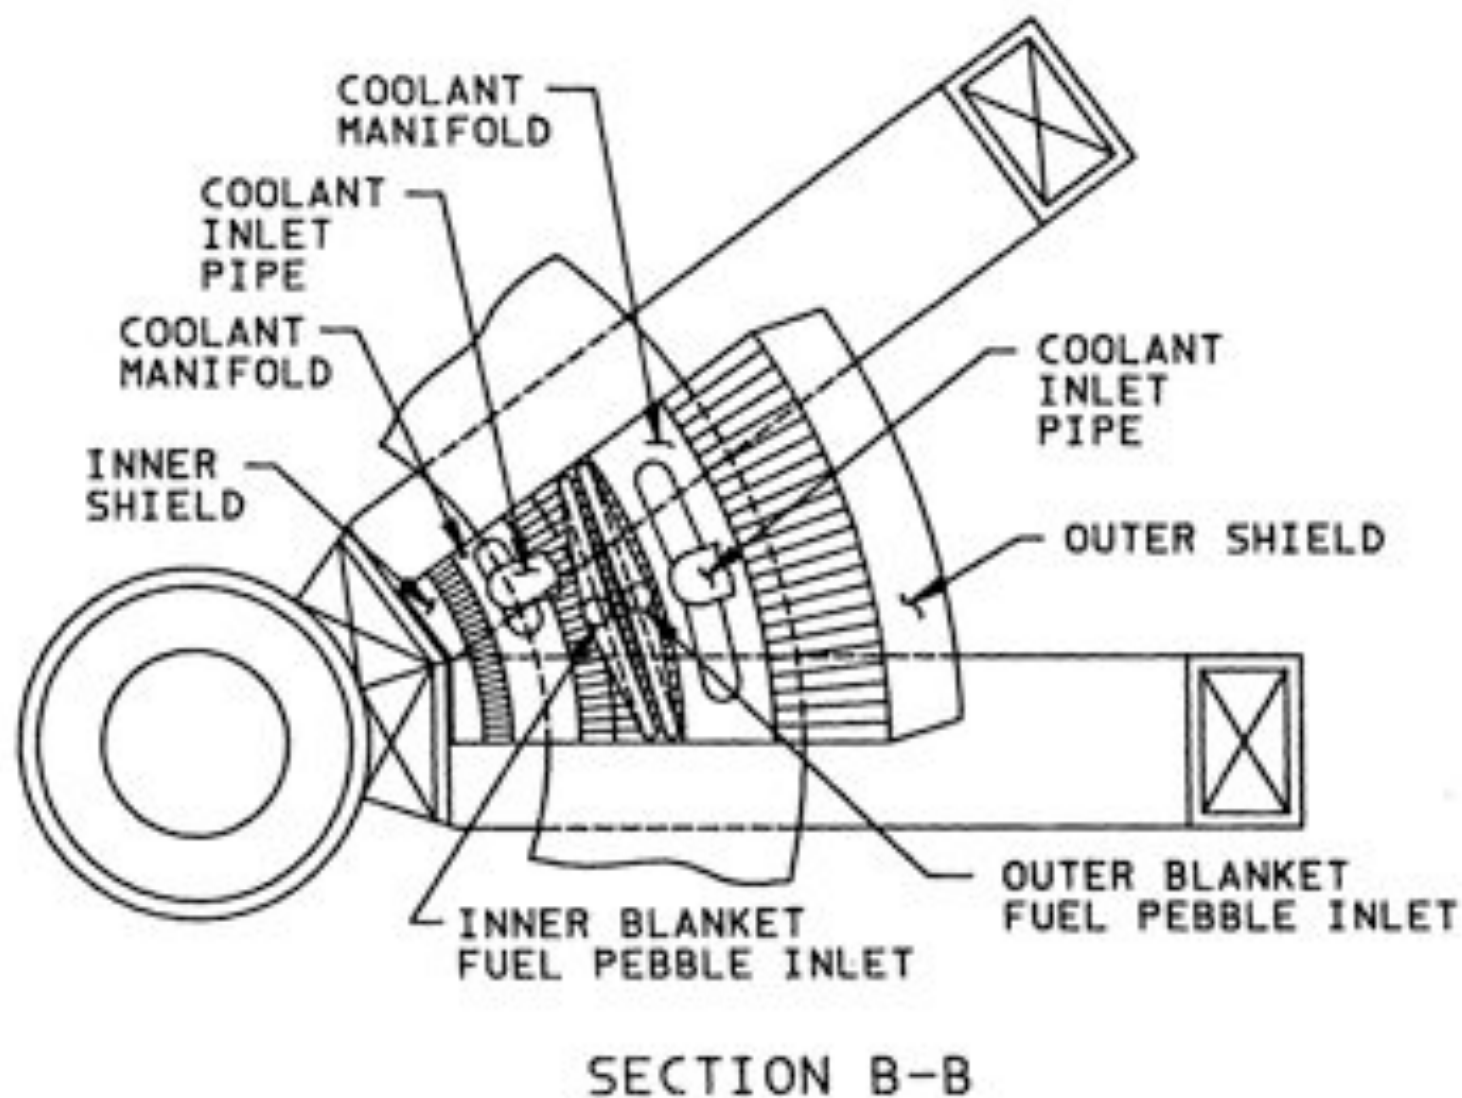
Top view of a sector for the Fusion Breeder Reactor illustrating upper blanket portion of coolant inlet manifolds and fueled sphere inlets (alternate concept with bottom-mounted divertor).
